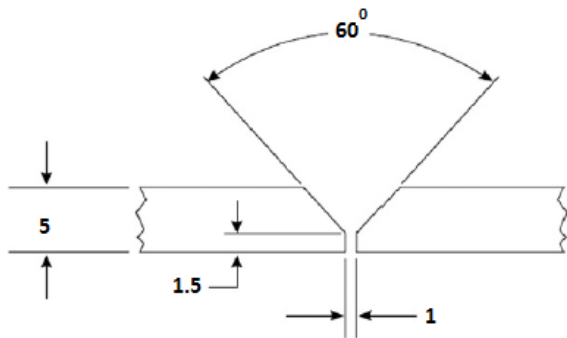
Single V groove joint (mm) as per ISO 9692 Weld Joint Preparation
